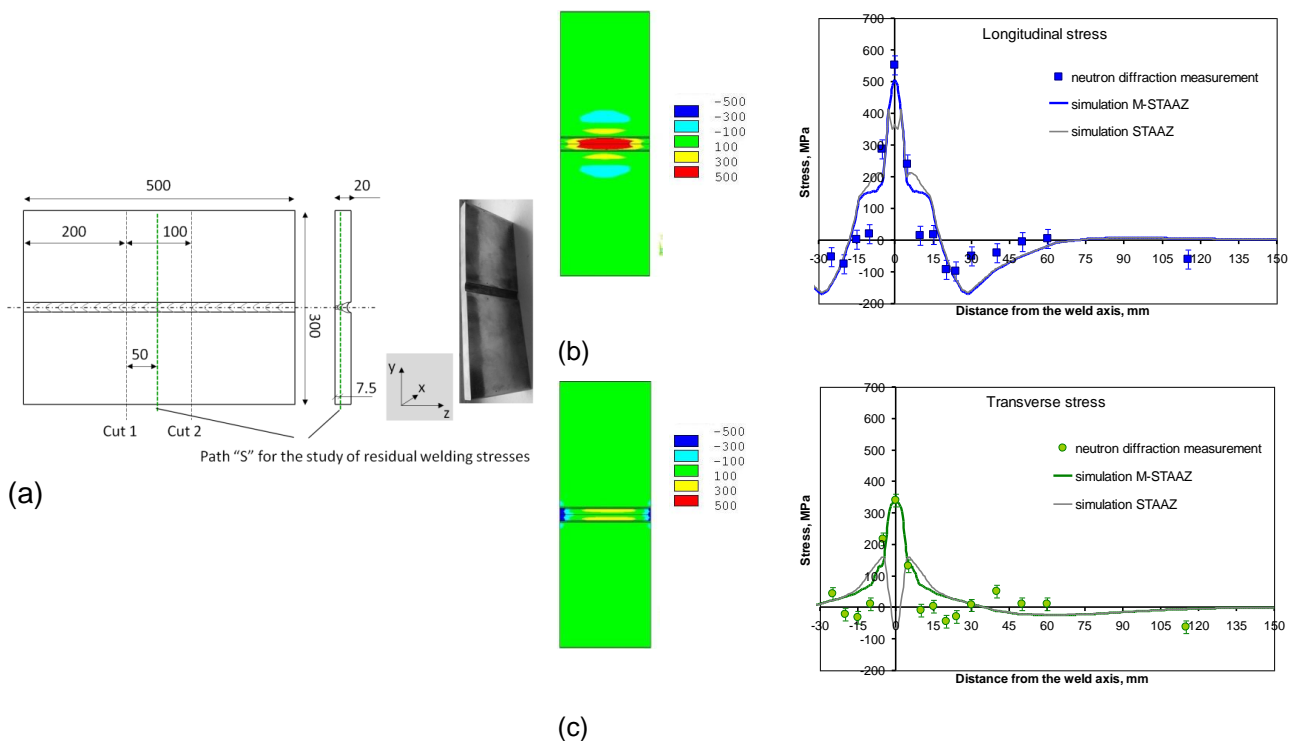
I-16. Sample cut from a thick (~ 20 mm) plate welded with multi-pass submerged arc welding (SAW-welding). "S" is a scan-line in neutron measurements. Arrows indicate the strain tensor components (X, Y, Z) (a). Full map of distribution of the longitudinal component (σ_x) in the tensor of residual stresses calculated by the finite element method (FEM) and the comparison of the experimentally measured σ_x -values along the scan-line "S" with the results of numerical modeling by FEM (solid line) (b). Full map of distribution of the transverse component (σ_y) in the tensor of residual stresses calculated by FEM and the comparison of the experimentally measured σ_y -values along the scan-line "S" with the results of the numerical modeling by FEM (solid line) (c).
